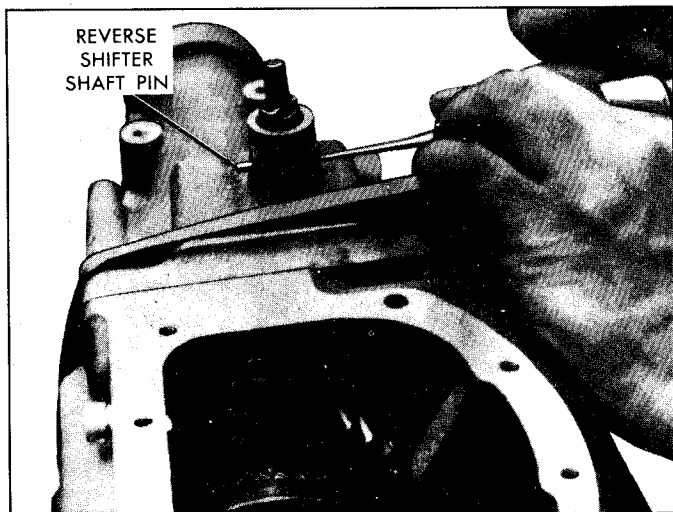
B-3K--Removing Reverse Shifter Shaft Lock Pin
